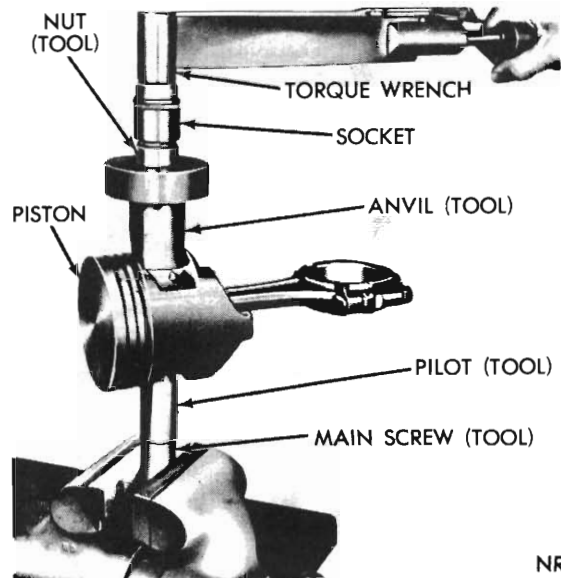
Testing fit of piston in connecting rod (Tool E9C50B)
